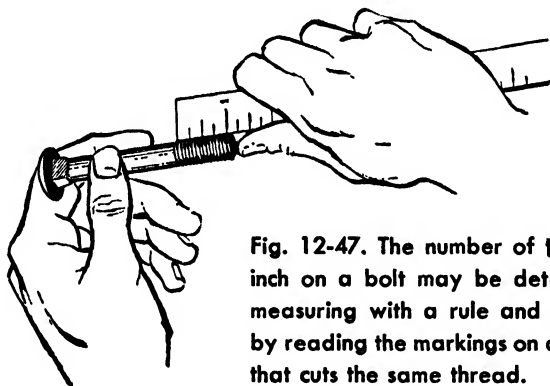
The number of threads per inch on a bolt may be determined by measuring with a rule and counting or by reading the markings on a tap or die that cuts the same thread.
